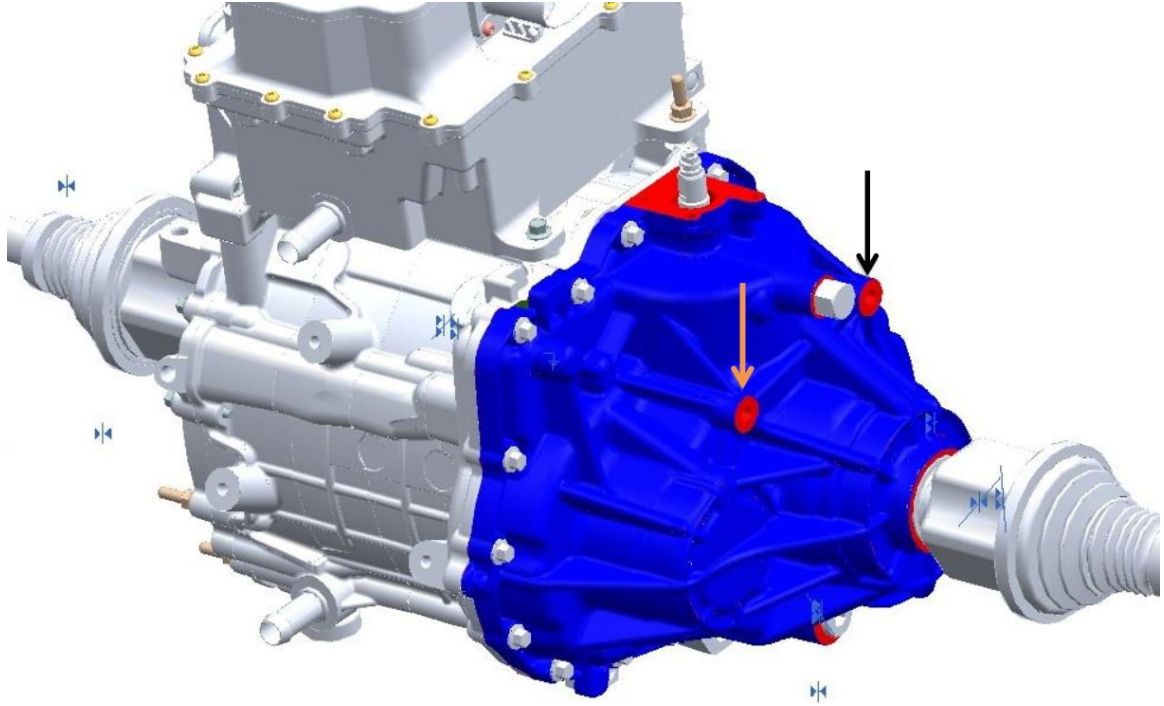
Driver's Side Mounting Points on Magna E-Drive.
